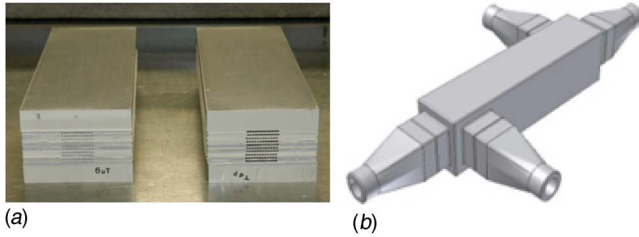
(a) Diffusion bonded alloy 617 blocks and (b) a complete PCHE assembly with headers
